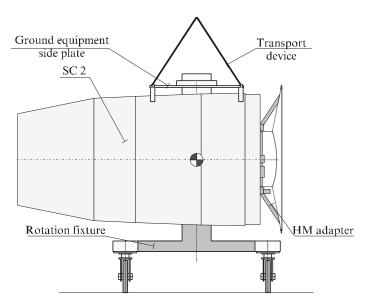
Spacecraft with HM adapter on Customer's rotation fixture in horizontal position
